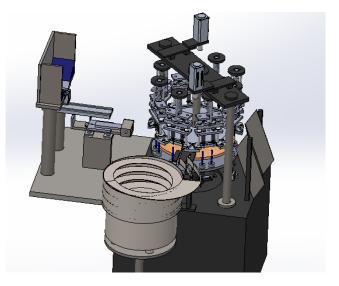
Workstation with feeder bowl ,pick & place mechanism
